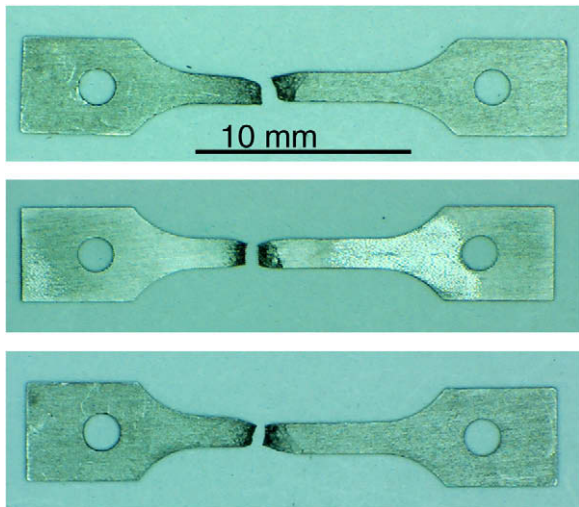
Necking and final fracture in Ti45Nb–Nb weld joint tested at 295, 173, and 77 K (from the top). Necked and fracture occurred around the weld metal–Nb boundary.
